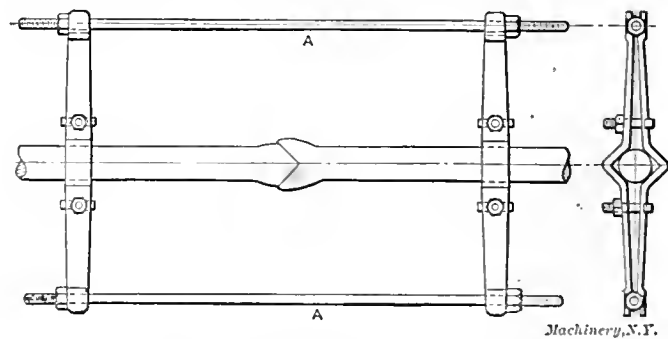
Heavy Shafting prepared for Welding.
